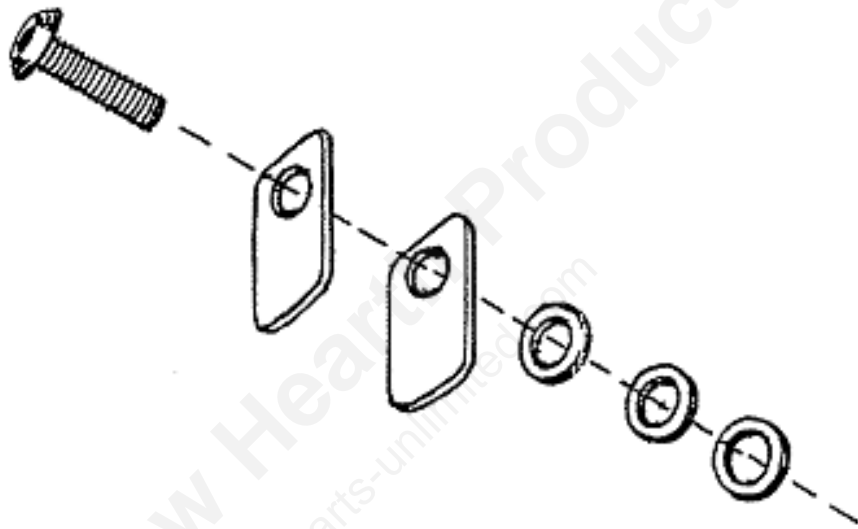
LOWER HINGE PIN WITH JAM NUT
